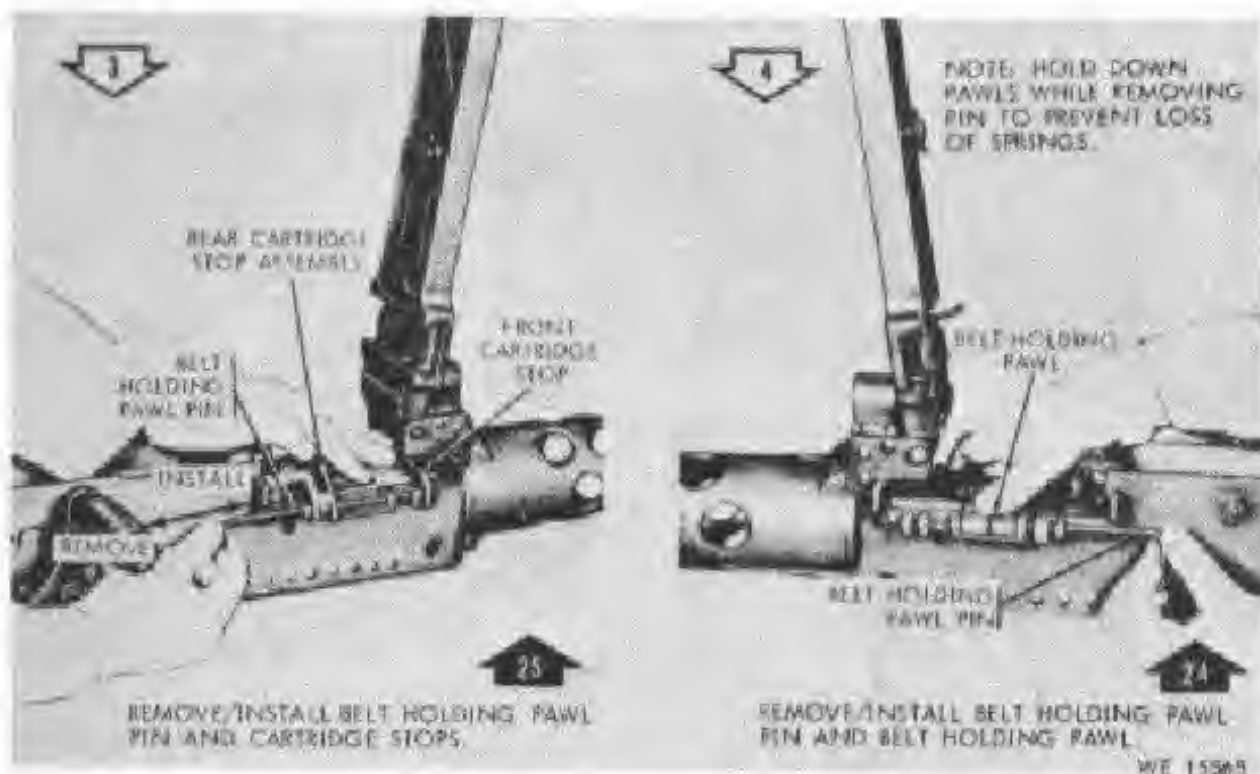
Disassembly/assembly of Caliber .50 Machine Gun, M2. (2 of 20)
